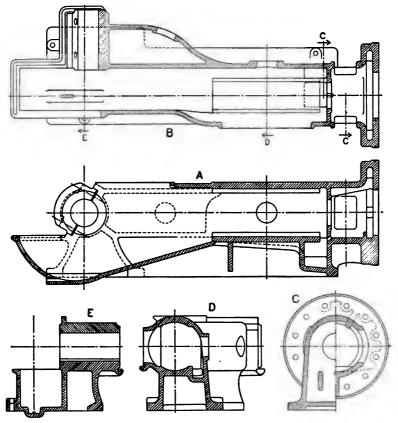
Bed of 16' by 16" Fleming Four-valve Engine, Fig. 215.
